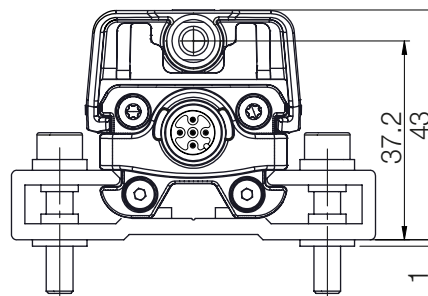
Dimensions and distances with BAM TG-IR-037-A
